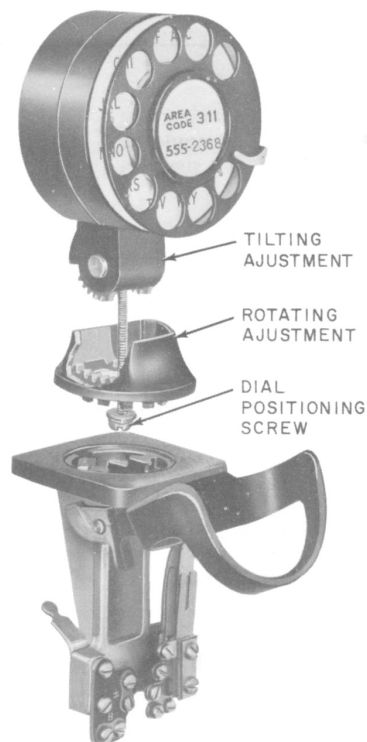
Positioning Adjustments of 43A Dial Mounting
